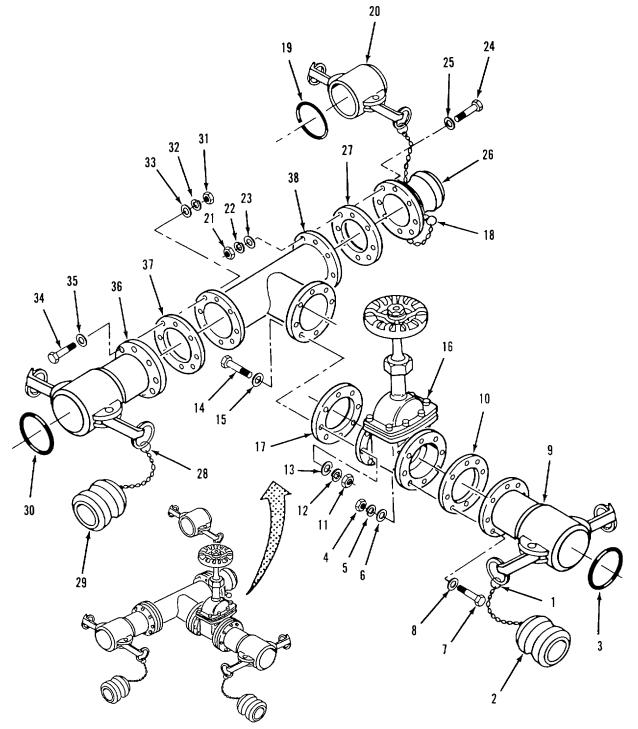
Tee and Gate Valve Assembly (9114-Y5) Repair.
